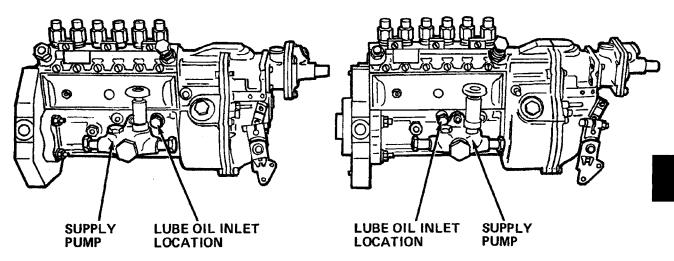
Lube Oil Tube Assembly Identification Figure
